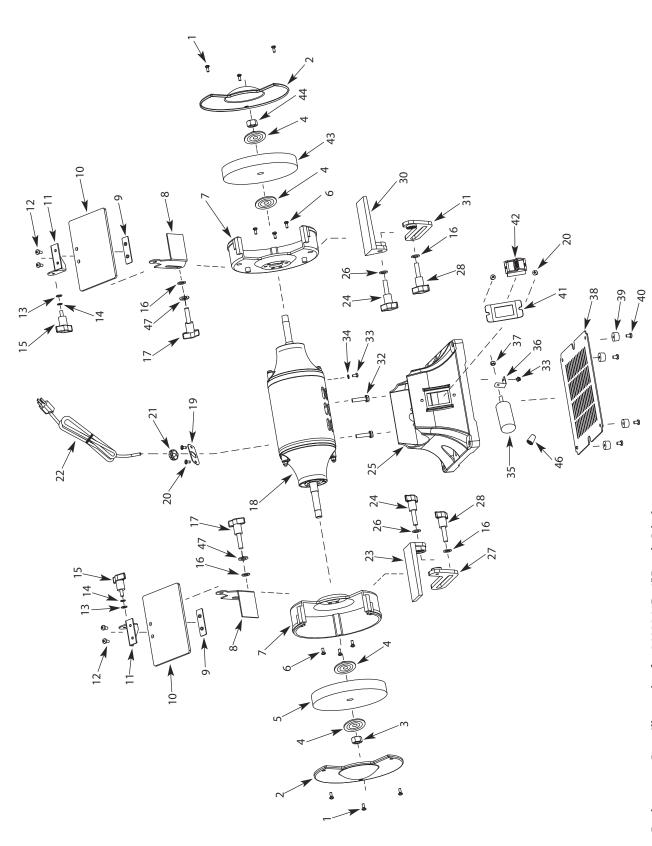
Replacement Parts Illustration for 9682061D, 6" Bench Grinder
